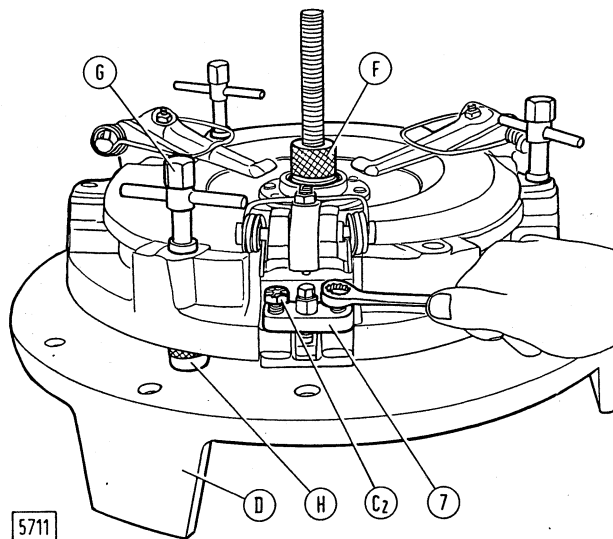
Dismantling (assembling) the 10" clutch on the universal fixture A 711063/68B (D).
